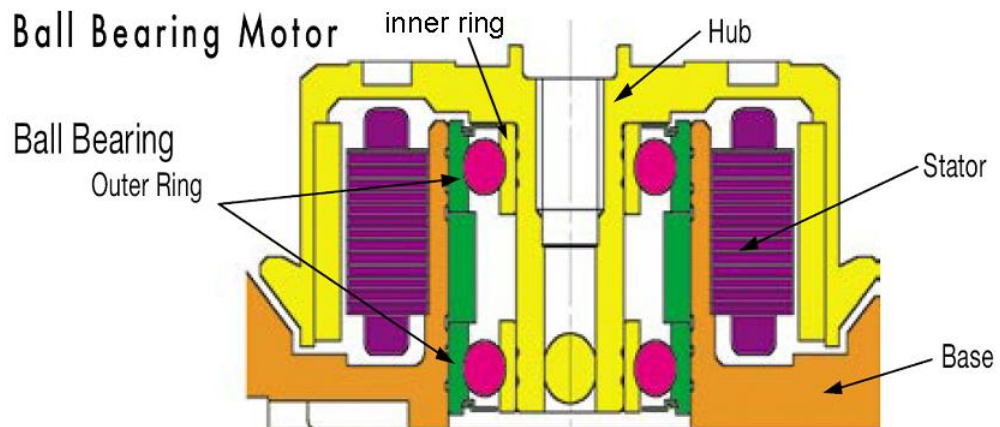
Schematic of ball bearing spindle motor (source [6, 13])
